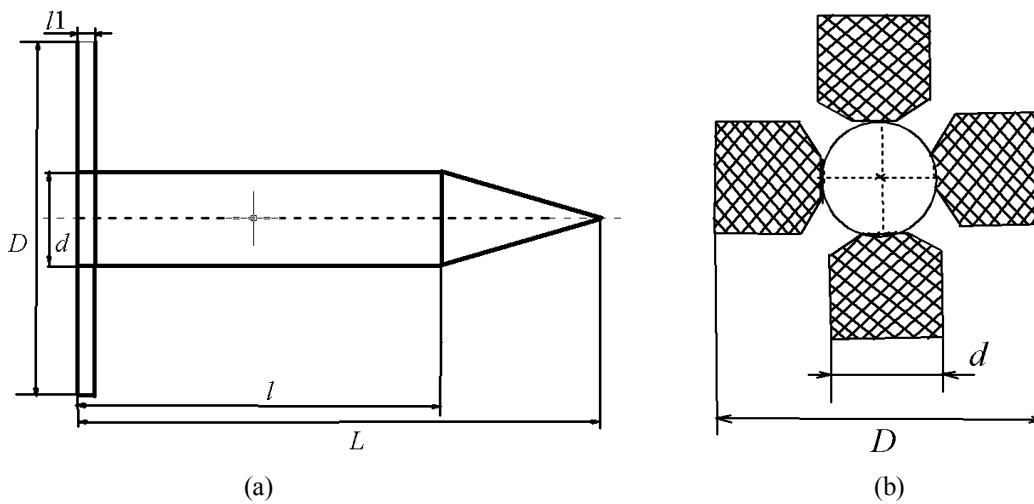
The external appearance of UAV with latticed wings: (a) is the side view; (b) is the front view
